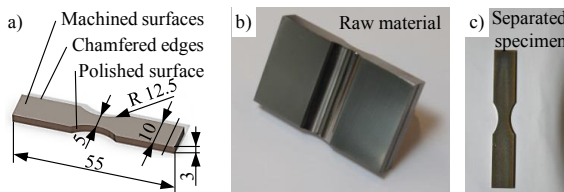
HCFB specimen geometry (a), raw material (b) and separated specimen (c)
